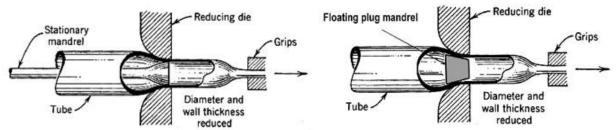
Tube Drawing over Fixed Mandrel (left); tube Drawing over a Floating Plug Mandrel (right)
